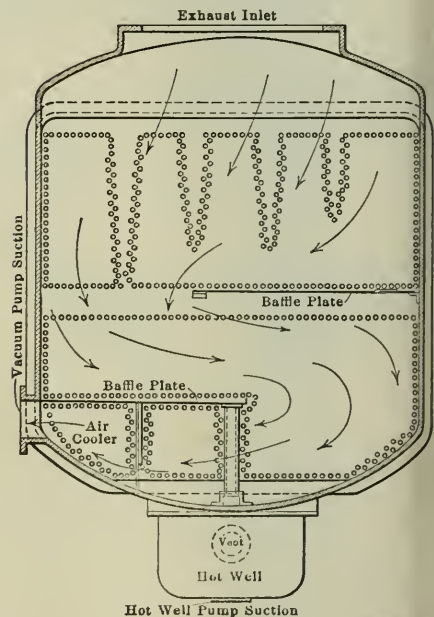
WORTHINGTON IMPROVED TUBE PLATE
